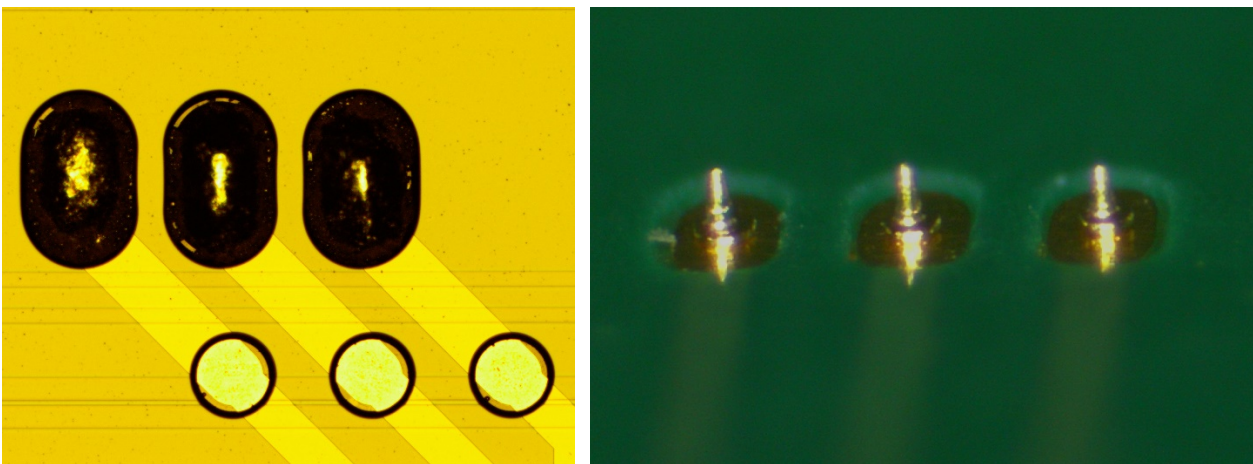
A microscope image of screen printed solders on the switch chip and stud bumps on the corresponding PCB.
